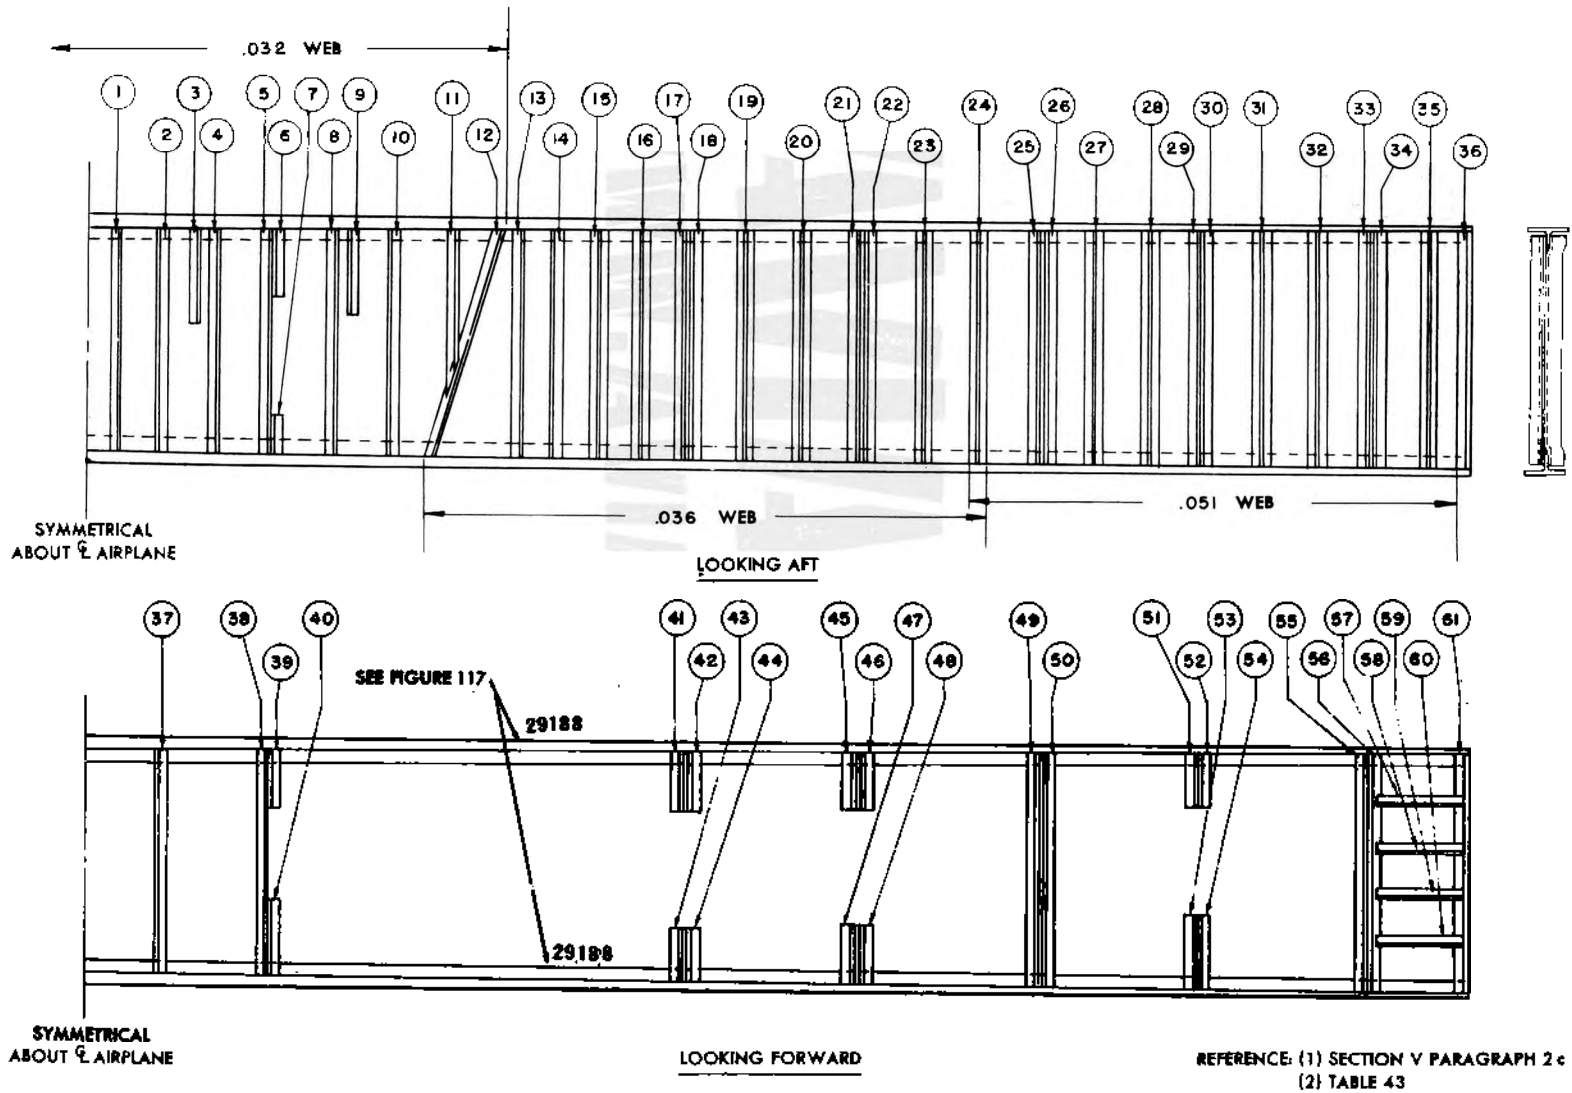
WING SPAR ASSEMBLY—CENTER PANEL 30%
